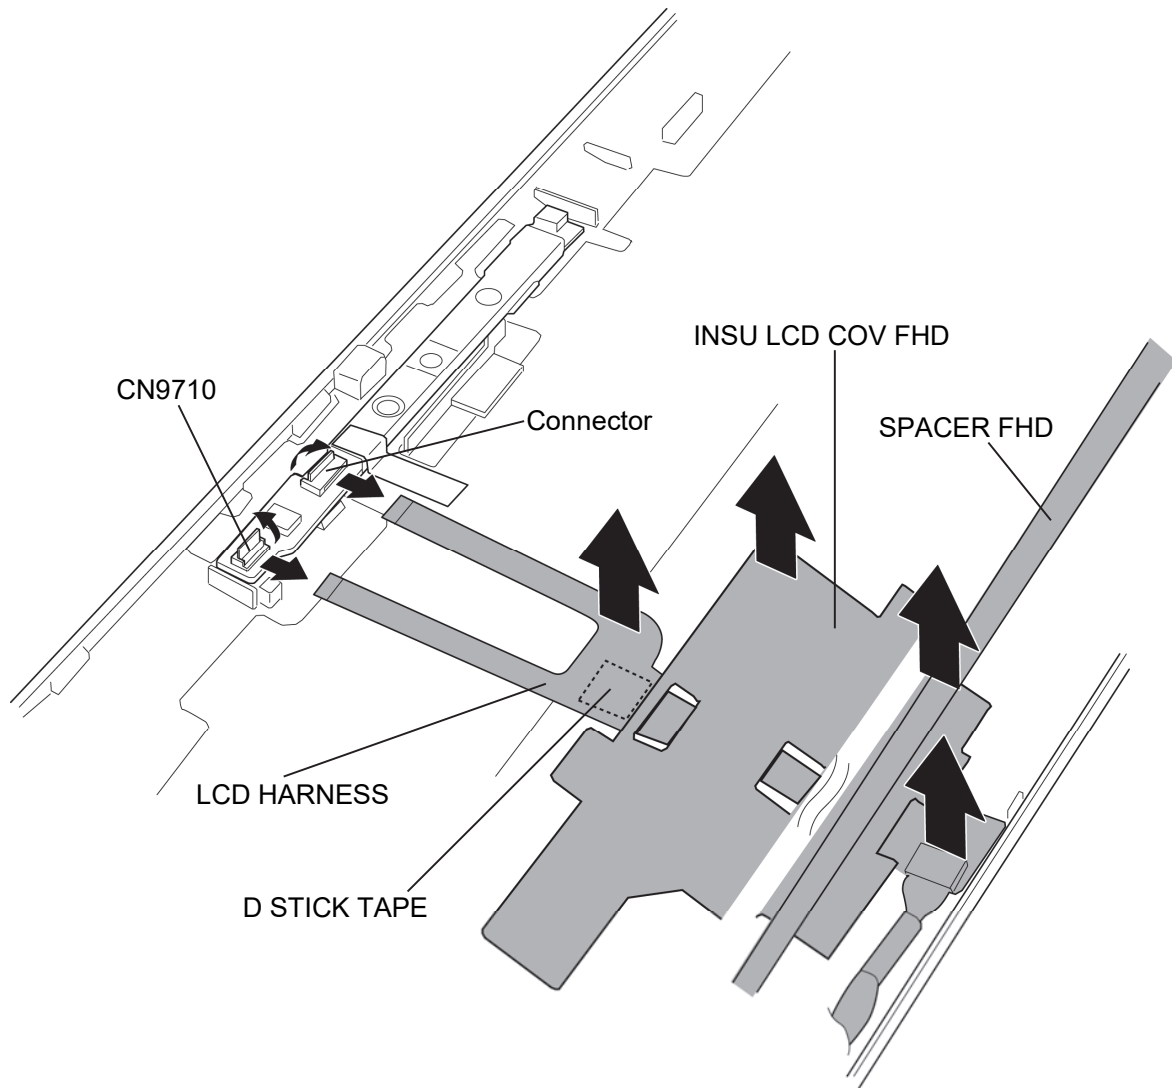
Removing the MIC BOARD/CAMERA MODULE (1)
